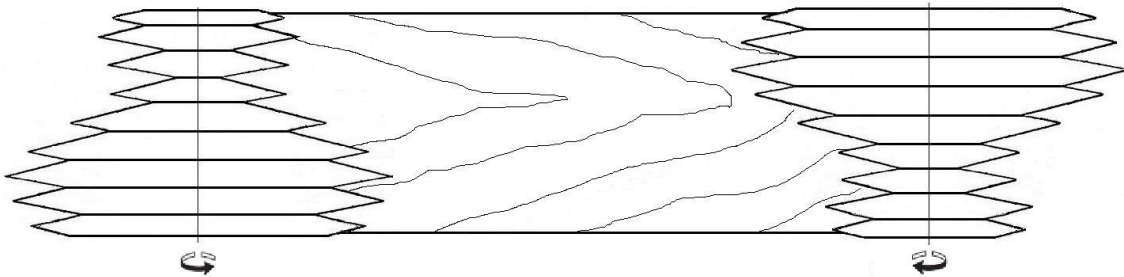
Simultaneous milling fingers by two cutters at the ends of two adjacent workpieces
